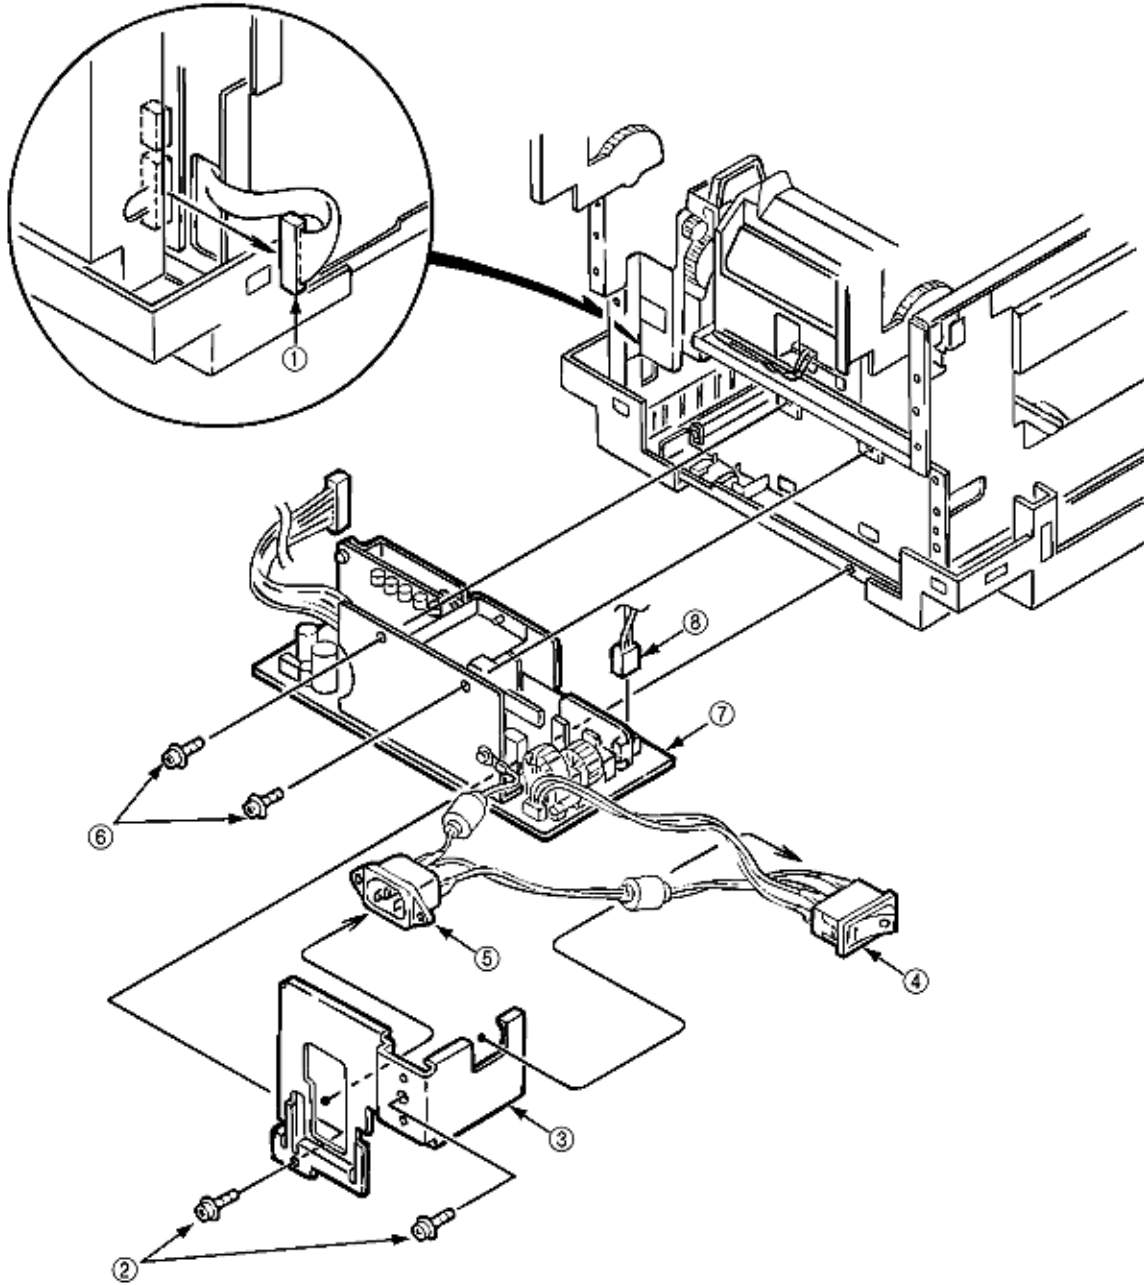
Power Supply Unit, Holder Inlet, Sheet Insulation
